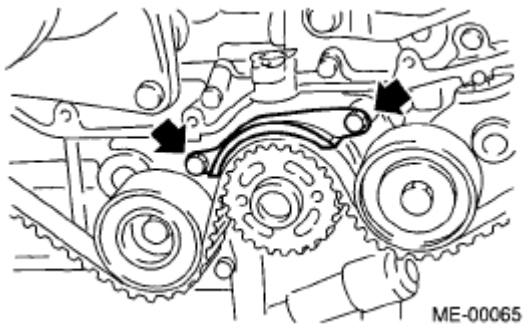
Locating Timing Belt Guide Bolts (MT Model)
